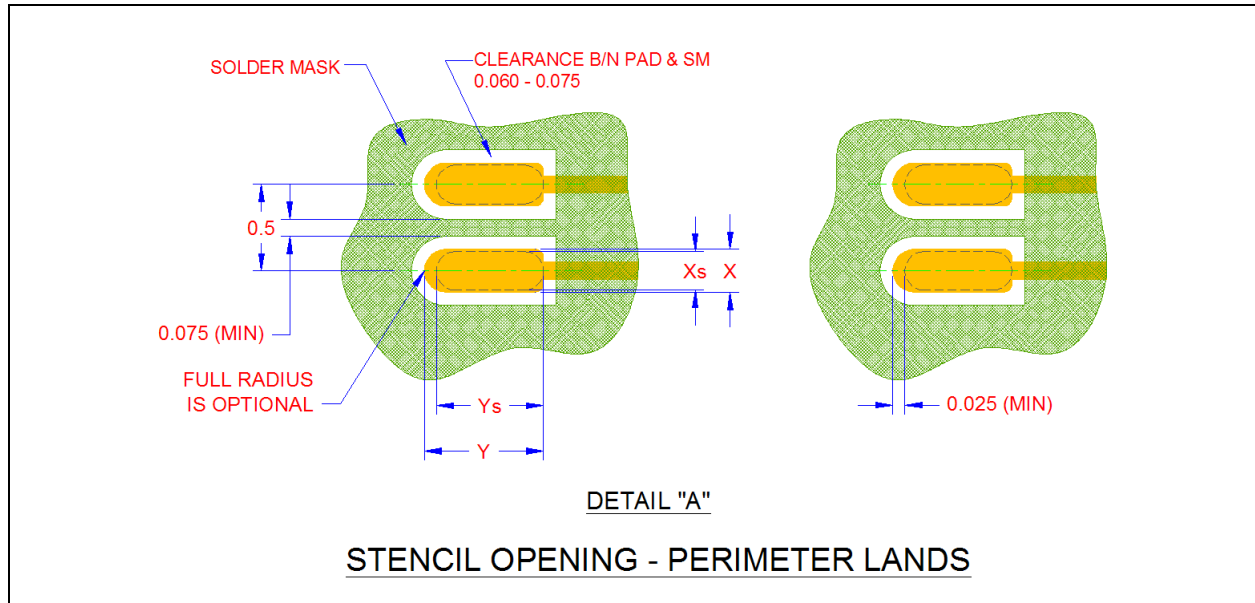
CAP1188 PCB Detail A - 24-Pin QFN 4mm x 4mm
